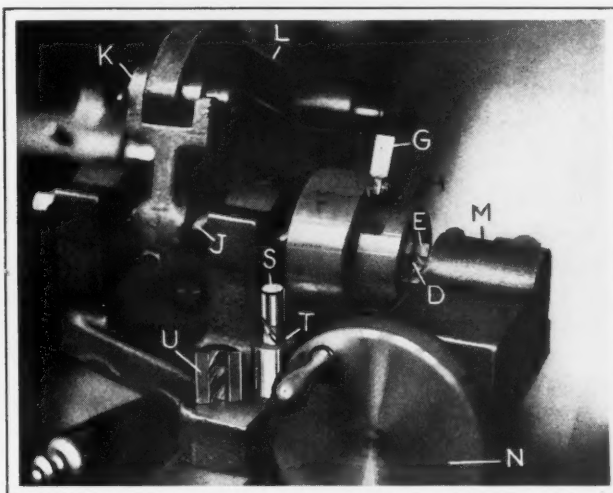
Device for Cutting Flutes in the Bore of Part C, Fig. 1
